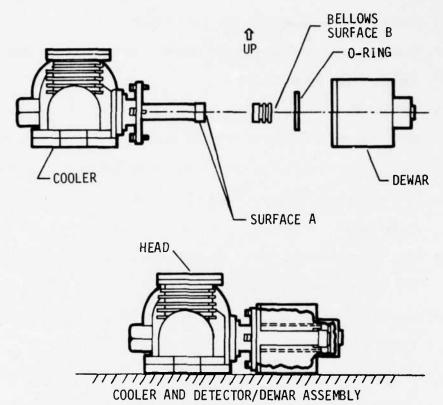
Cooler and Detector/Dewar Assembly
